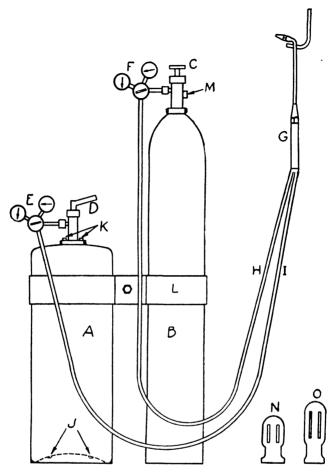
Oxygen-Acetylene Welding Equipment: A. Acetylene cylinder, B. Oxygen cylinder, C. Oxygen cylinder valve, D. Acetylene cylinder valve, E. Acetylene regulator and gauges, F. Oxygen regulator and gauges, G. Torch, H. Oxygen hose, I. Acetylene hose, J & K. Acetylene fuse plugs, L. Cylinder support, M. Oxygen safety plug, N. Acetylene cylinder valve cap, O. Oxygen cylinder valve cap
